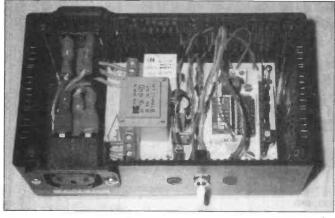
shows the assembly of the PCB board of the unit. The PCB board is fixed inside a plastic box. The cutting of the box is shown in figure 8 and the assembly of the unit is shown in figure 9.
